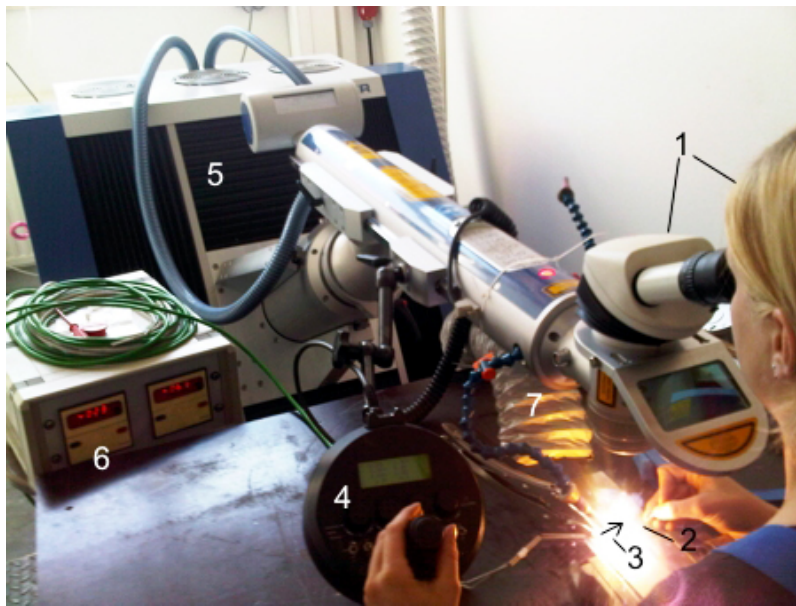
Handling of AL Flak mobil 300. 1 operator surveilling weld on stereo microscope, 2 right hand filler material provision, 3 welding spot and welding direction, 4 control joystick and axle velocity adjustment panel, 5 laser source, 6 two channel temperature measuring, 7 fumes suction system
